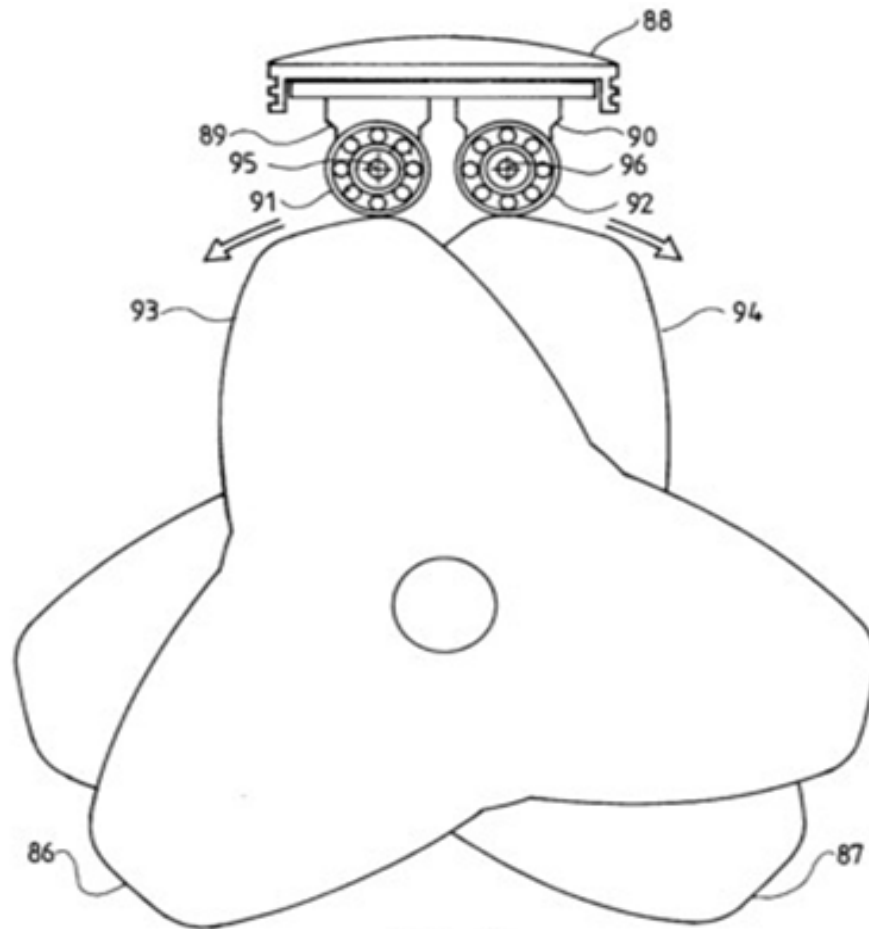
View of portion of an engine showing a piston in contact with counter rotating trilobate cams.
